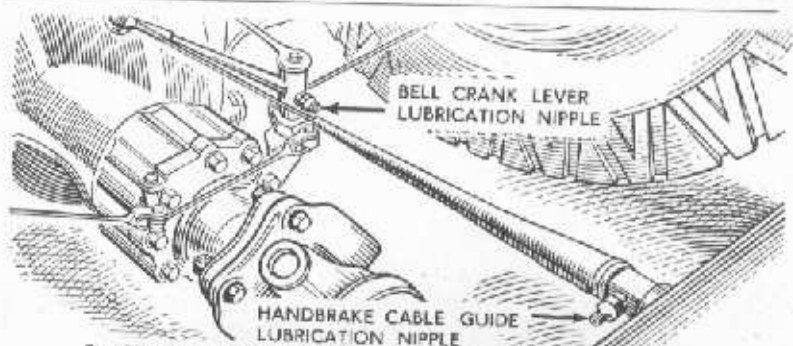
Handbrake cable guide and bell crank lubrication nipples.
